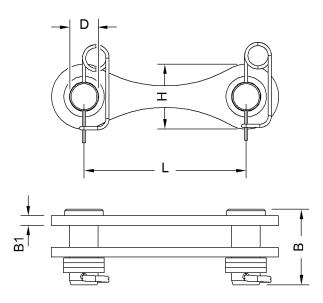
Dimensions of mid-point suspension backstay shackle with pins on the main boom after the attached reducing piece
